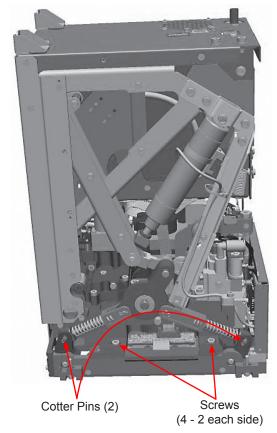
Screws Securing Faceplate to Latch Mechanism
